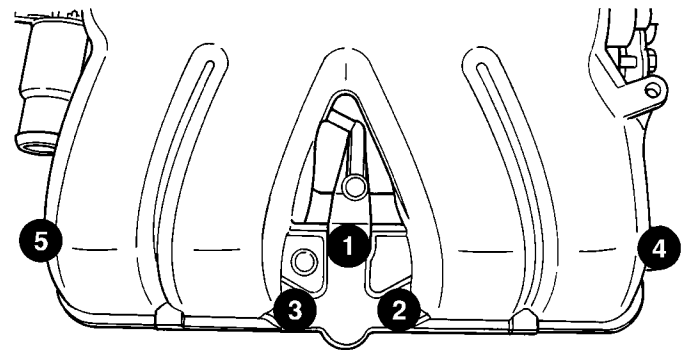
Upper Intake Manifold Tightening Sequence - 2.4L
